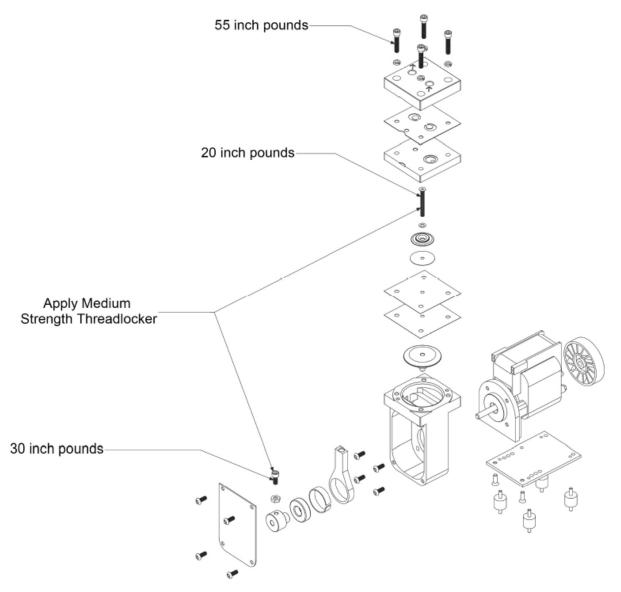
J161-FP-GB2 Bolt Torque Diagram
